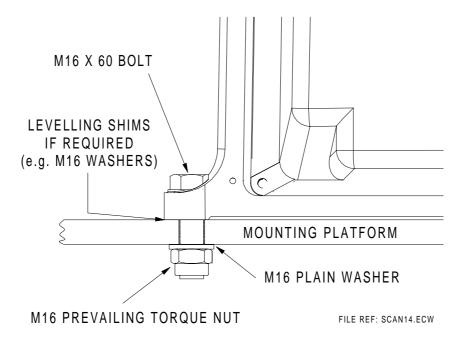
Fixing the Turning Unit to the Mounting Platform
